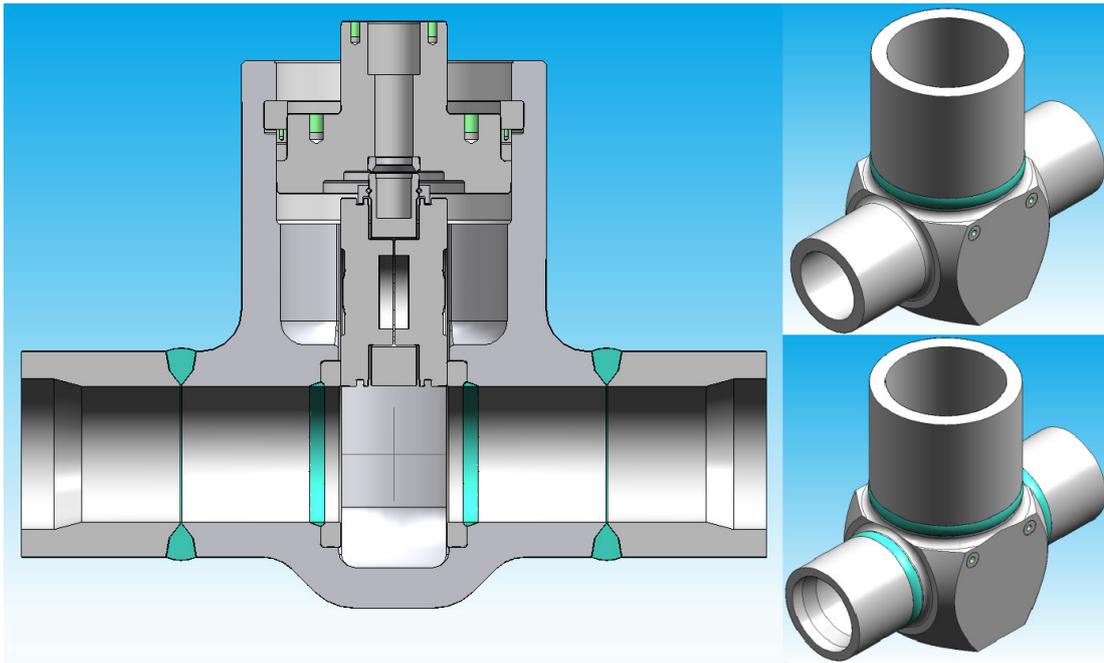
Different options for open die forging of a valve body: two piece (*left and right-top*) and four pieces (*right-bottom*).
